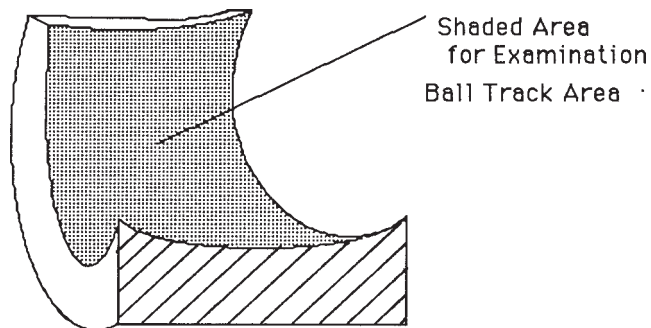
Partial Outer Ring of Double-Row Self-aligning Bearing
